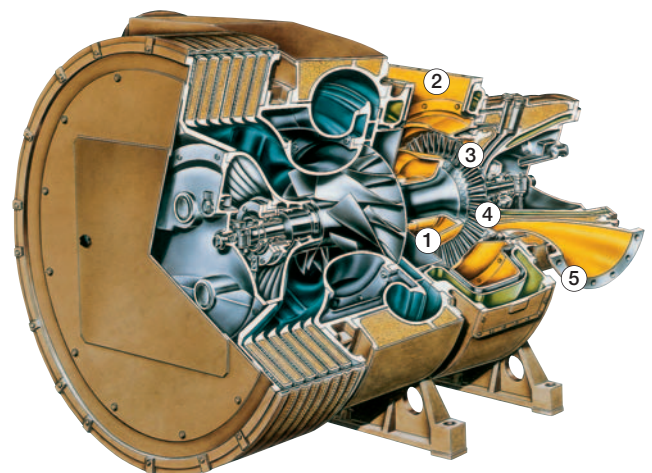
VTR..4E turbocharger: Arrangement of nozzle ring and turbine. 1 = Diffuser after turbine, 2 = Gas outlet casing, 3 = Nozzle ring, 4 = Turbine, 5 = Gas inlet casing.
